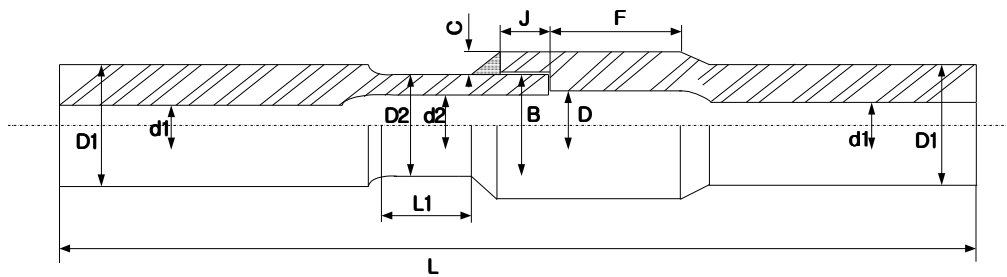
Drawing of 4-point bending fatigue specimen
